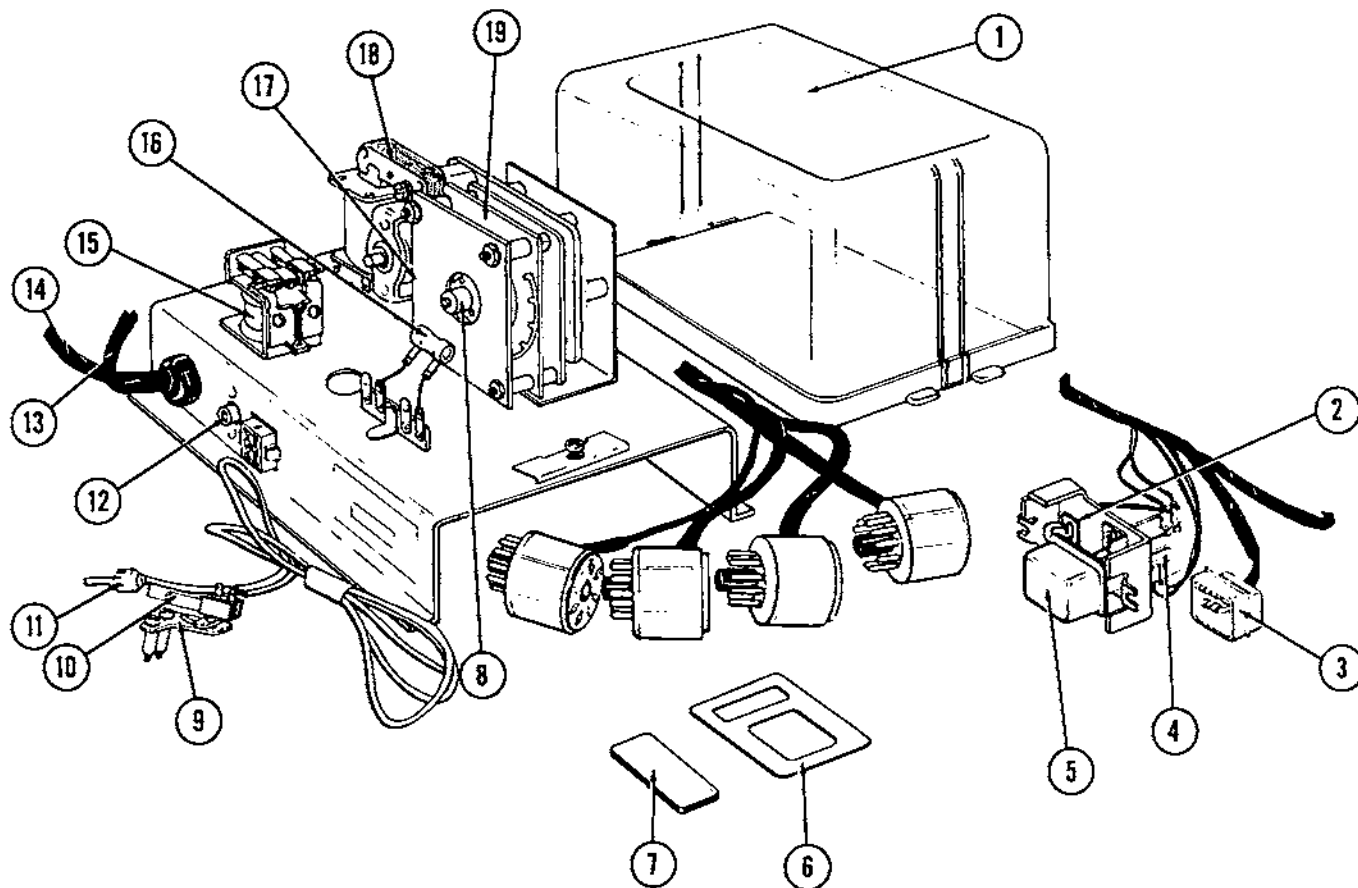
AUTOMATIC PROGRAMING ASSEMBLY
